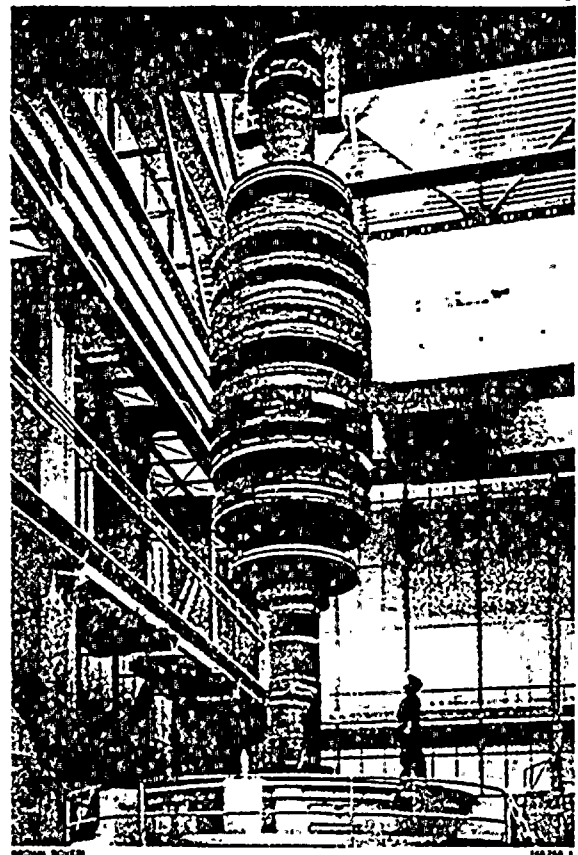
Low-pressure rotor of the "Cook" turbine (weight approx. 200 t) being removed from the furnace after being welded and stress relieved
